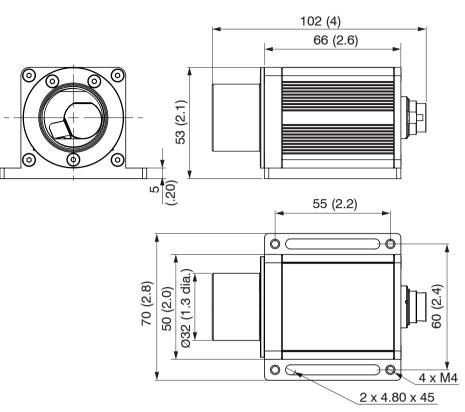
Dimensional drawing optoNCDT ILR2250-100, dimensions in mm
